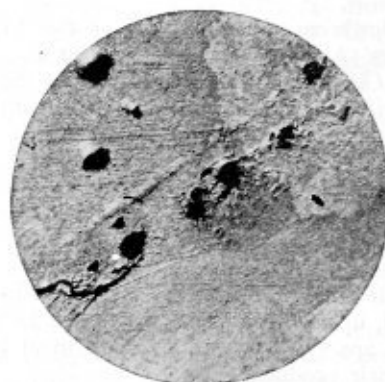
Section of One of the Welds in Fig. 1, Showing Blow Holes in Welding
